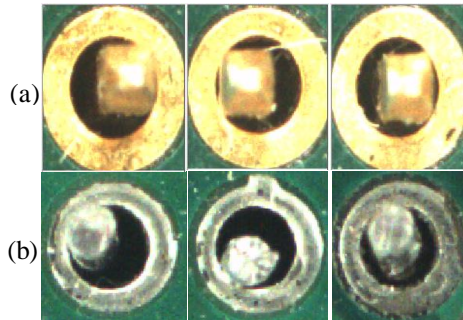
Impact of colour similarity between solder pad and component lead on segmentation accuracy. (a). For gold plated solder pads . (b). For tin plated solder pads
